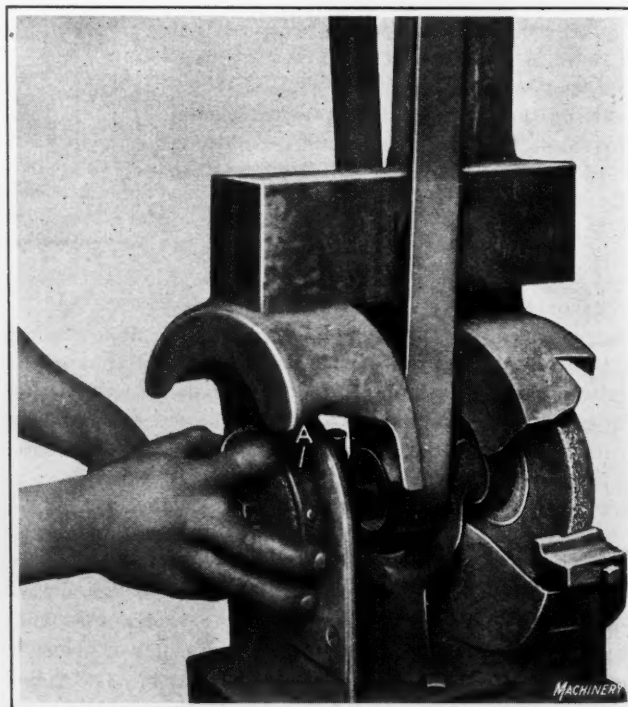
Grinding Stand and Hand Clamp for holding the Outside Piston-rings while performing a Snagging Operation on the Inside
